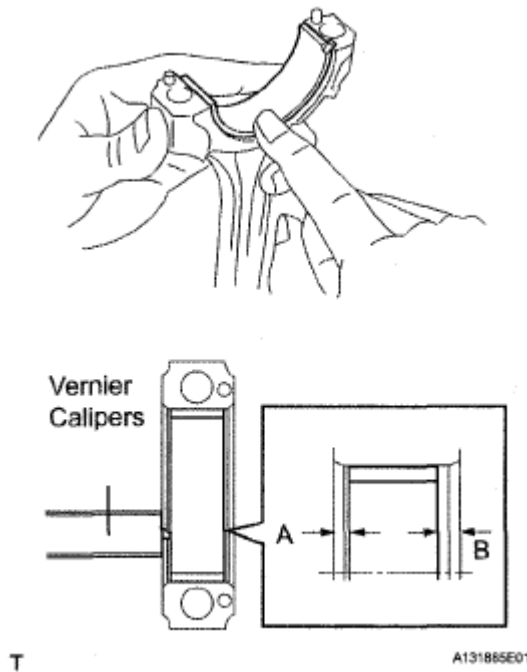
Measuring Distance Between Connecting Rod's And Bearing Cap's Edges
